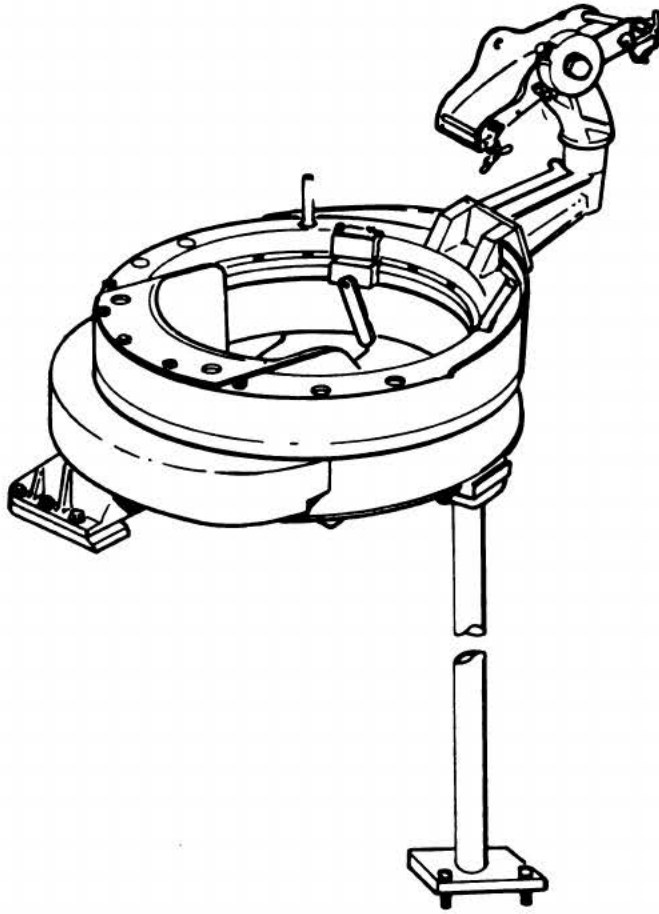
Mount, gun, ring M68 - 7027686 and mount, gun, ring M68E1 - 7076451.
